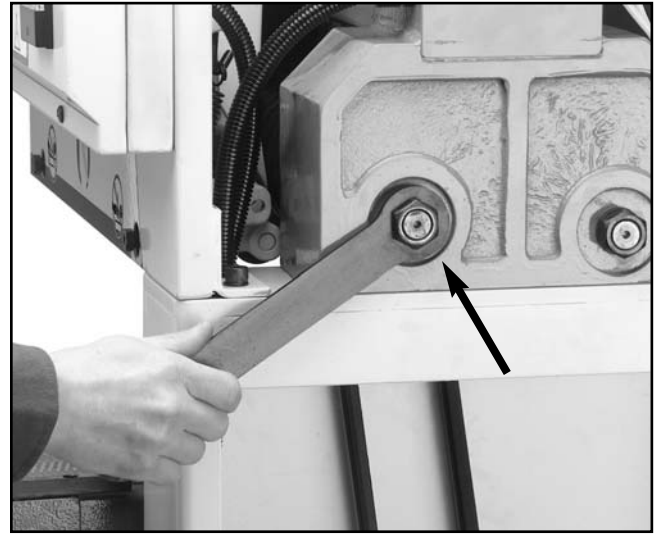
Remove this roller shaft nut located behind right-hand access door.
